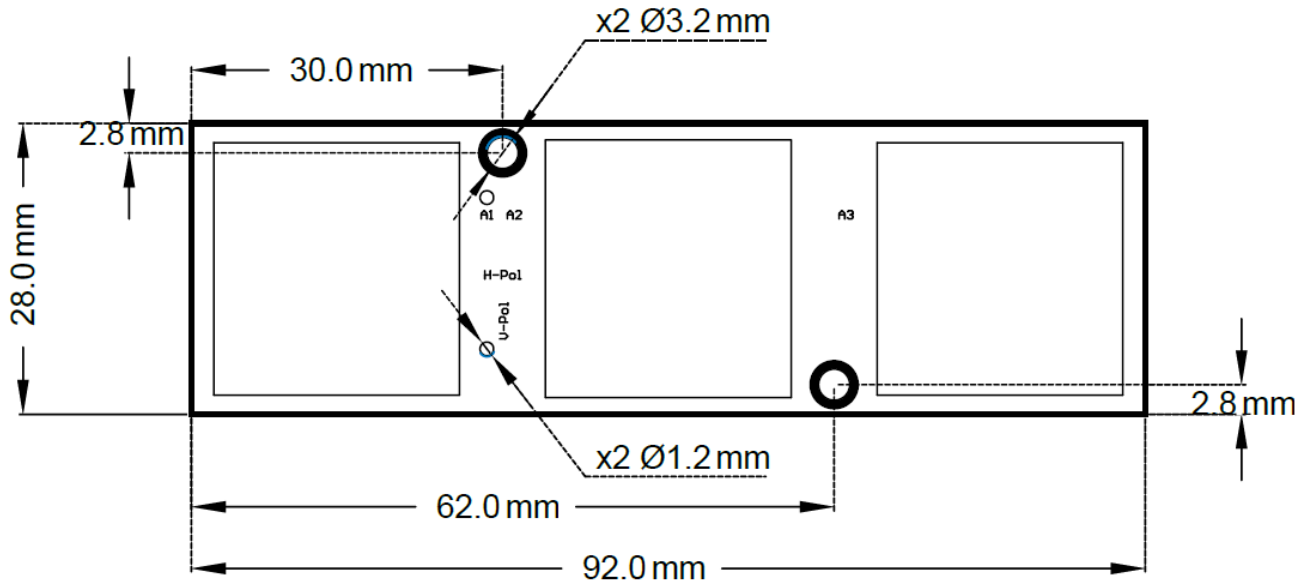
Physical dimensions of the ANT-B11 board (Top view)
